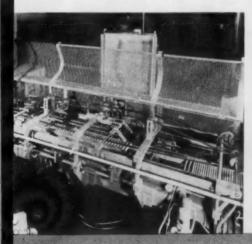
This transfer mechanism conveys, positions, and interlaces two stampings.
